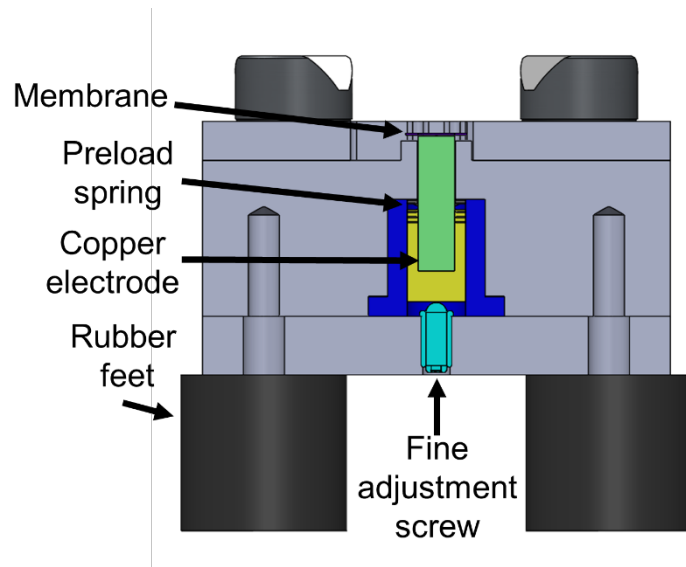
CAD model of first design for device mounting. The device sits on ball bearings and the electrode is positioned with a fine adjustment screw. Rubber feet help damp vibrations.
